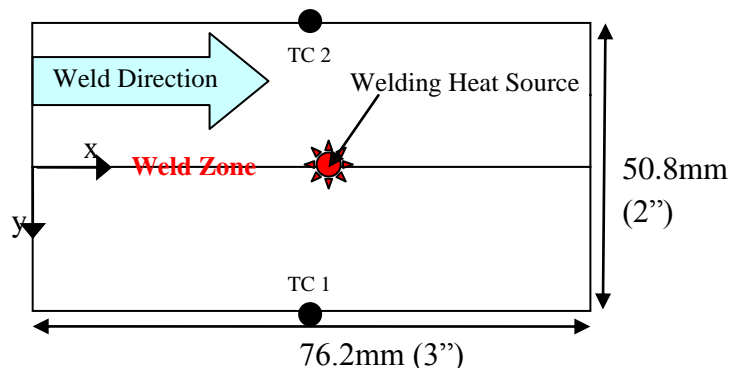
Schematic of specimen used during the Braze-welding with Preheat experiment
